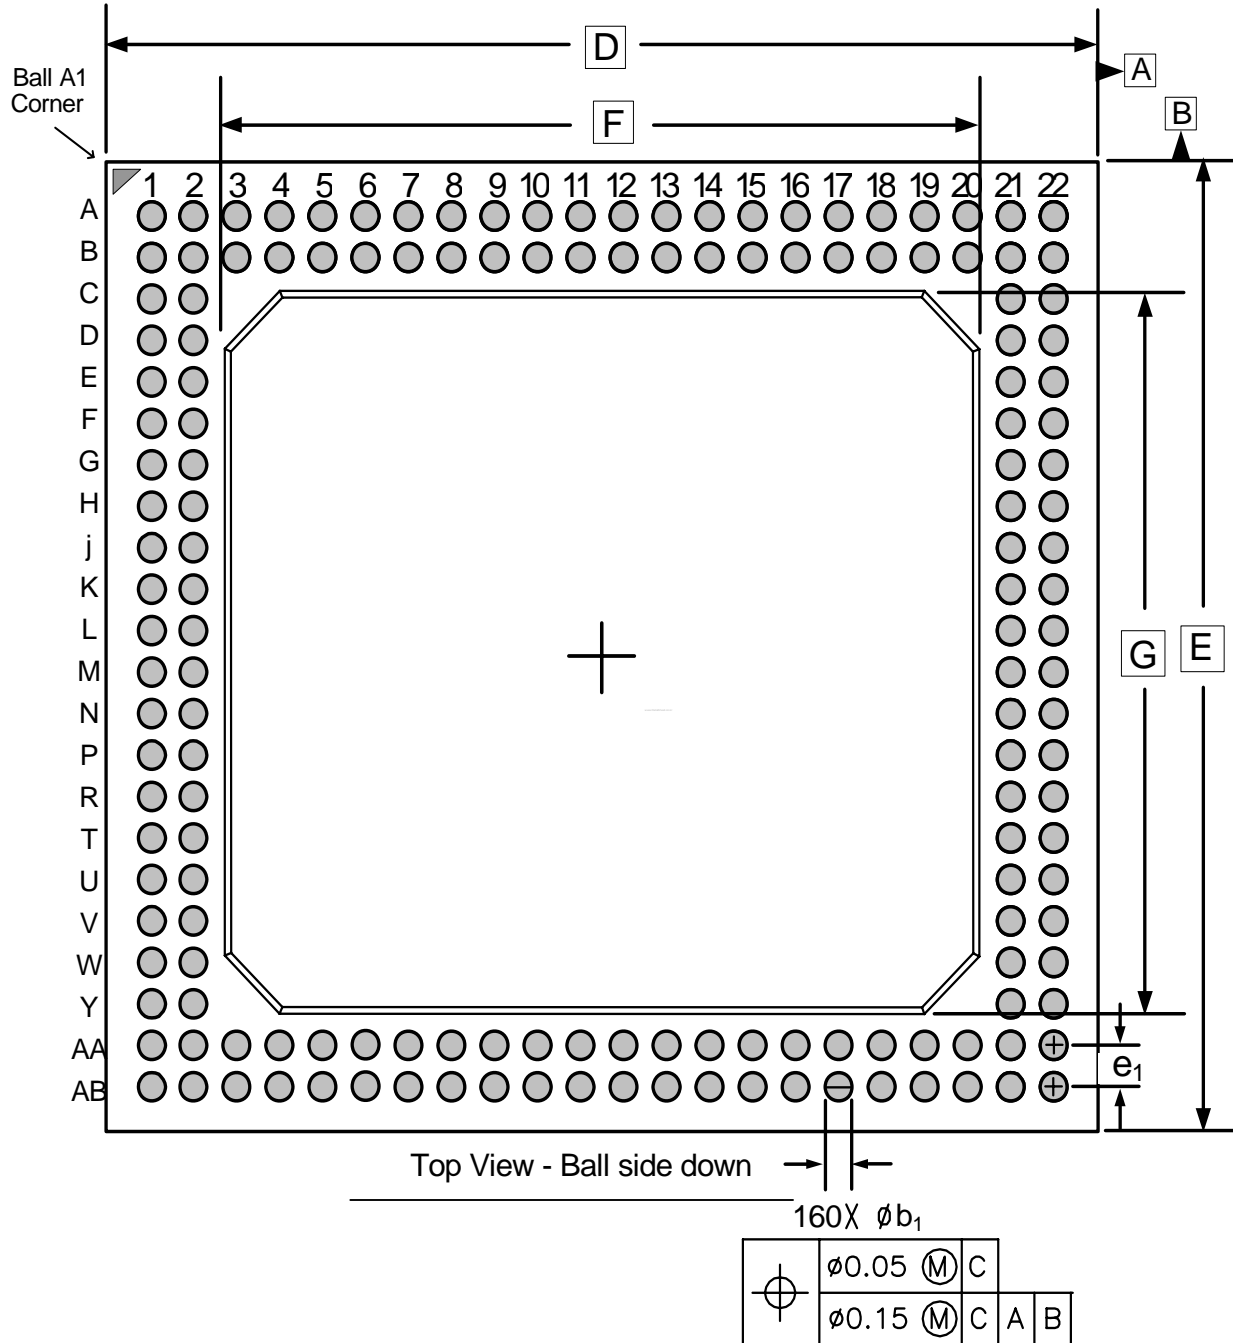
PXA322 Processor 15-mm² PoP Package, Bottom View
